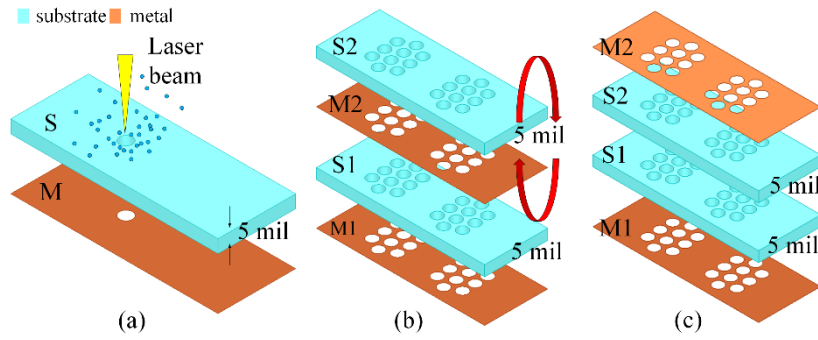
Manufacturing process of vertically stacked double-layer SINRD waveguide. (a) Penetrating through two backside metallized 5-mil substrates separately, (b) flipping over one of the substrates and assembly the two layers together, (c) 3D view
